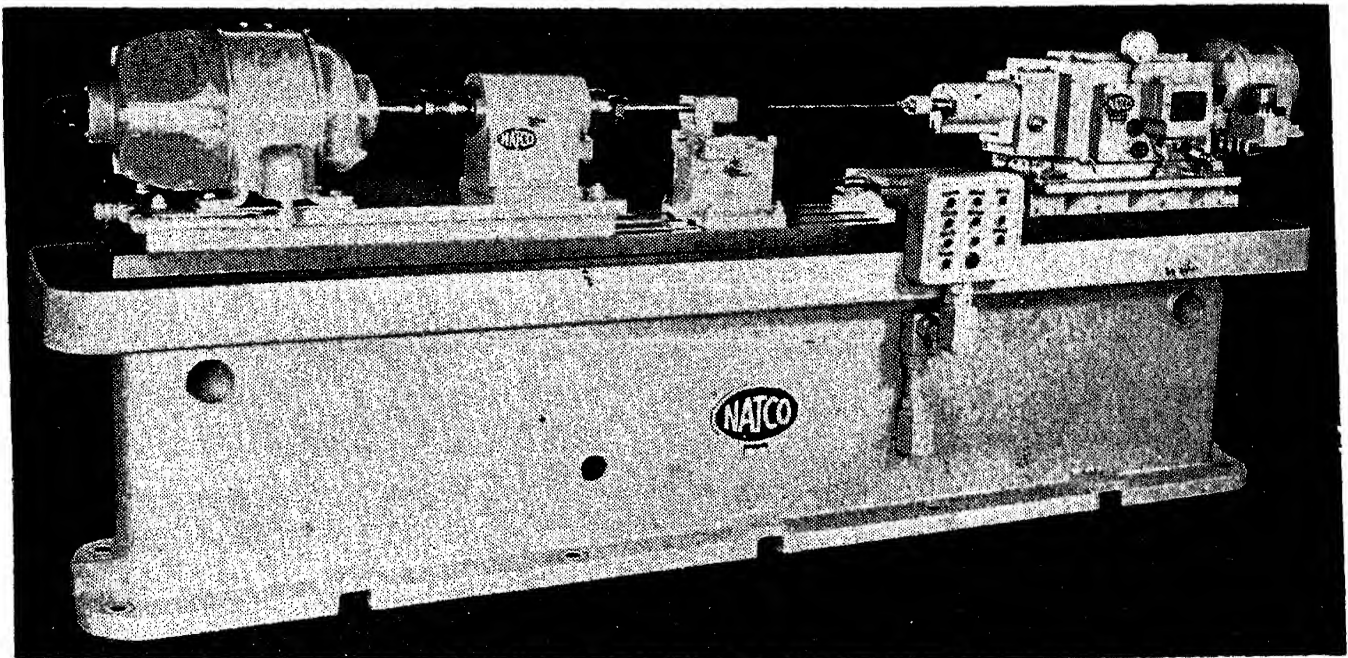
A deep hole drilling machine. (Courtesy National Automatic Tool Co., Inc.)
